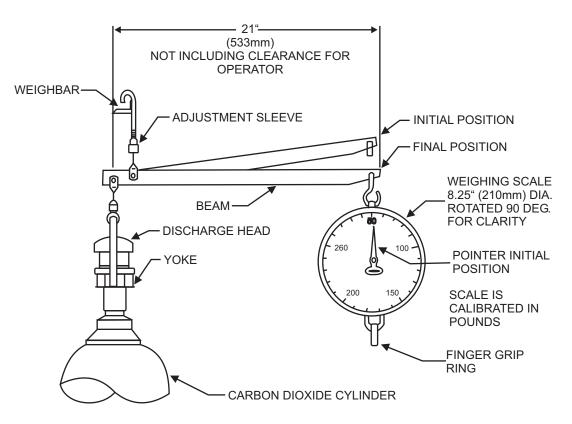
Weighing Carbon Dioxide Cylinder Using Scale P/N 81-982505-000
